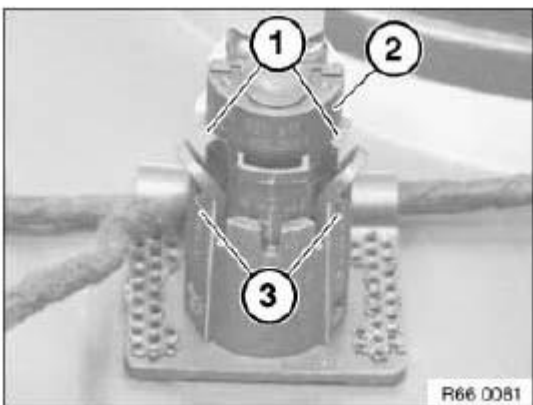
Identifying Hooks, Ultrasonic Transducer And Mountings
